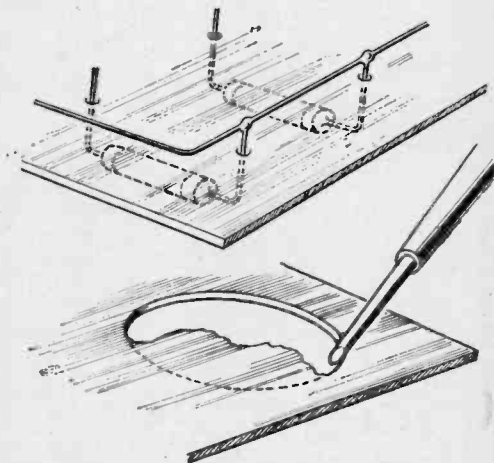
Method of fixing resistors and making holes in the plastic sheeting.
